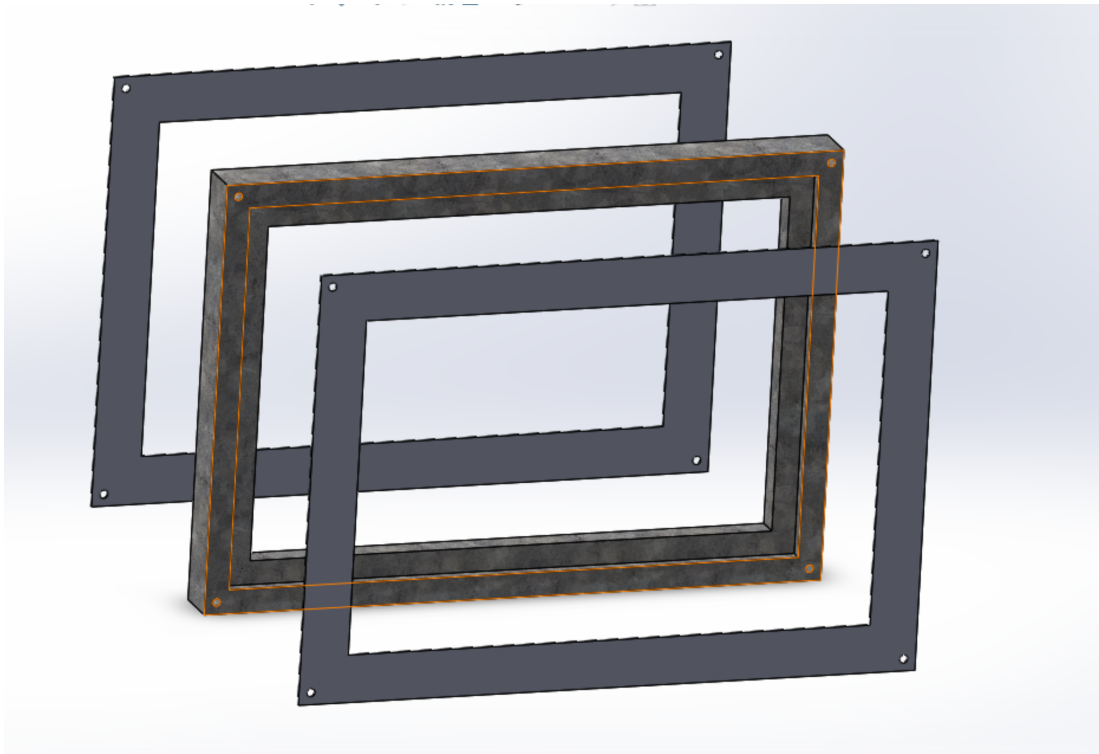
Displayed here is the door and viewing window, which comprises of 2 sections of 12mm thick polycarbonate, separated by 1" 316 stainless steel box section and sandwiched together using 3mm thick 316 stainless steel shell panels.
